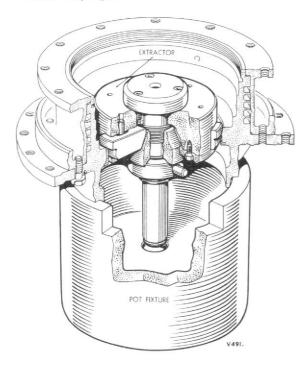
Pressing safety bearing out of rear bearing housing with extractor T.78038 and pot fixture T.78039.
